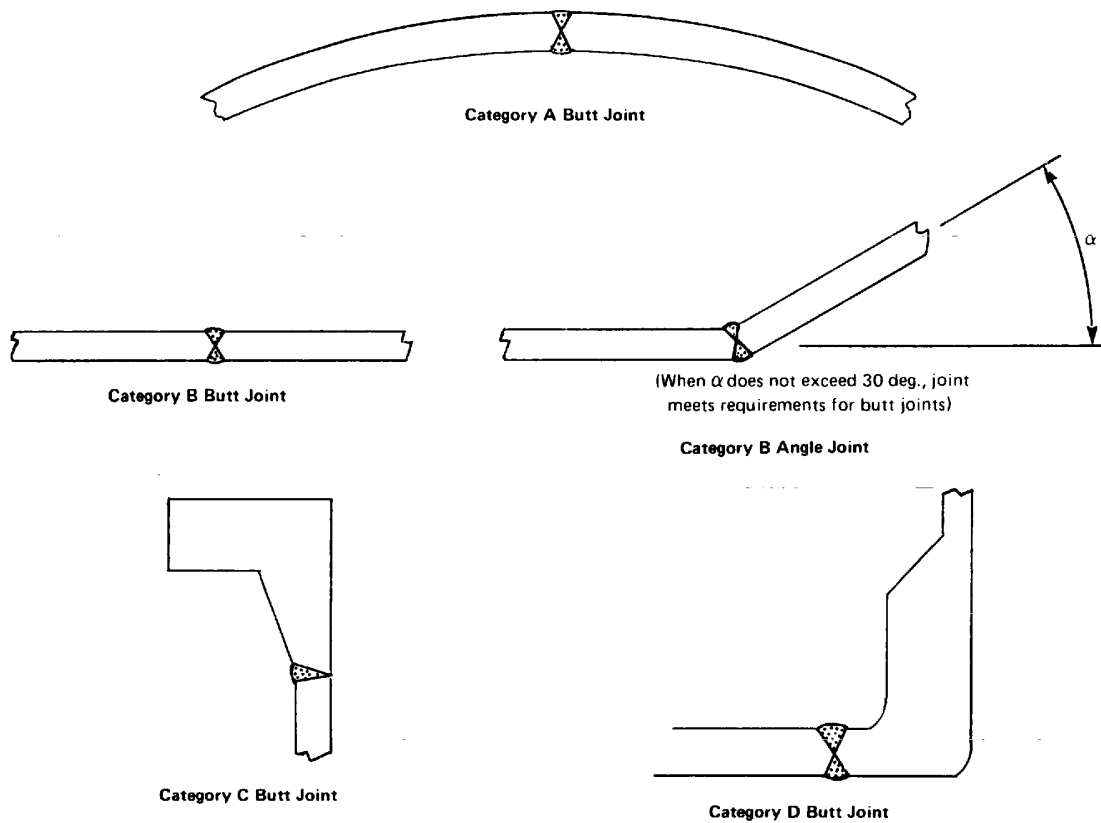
TYPICAL BUTT JOINTS
